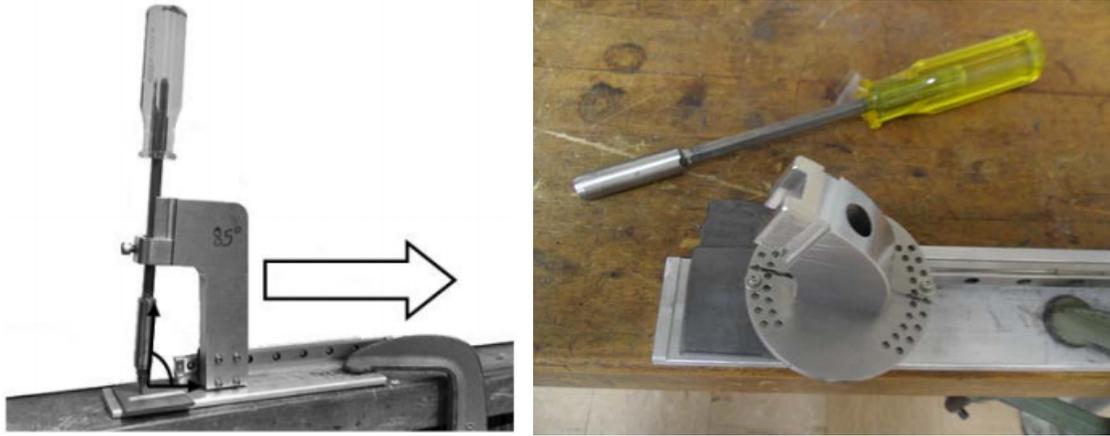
Apparatus used to make the samples. a) overall view; b) close-up showing jig used to provide controlled twist angles
